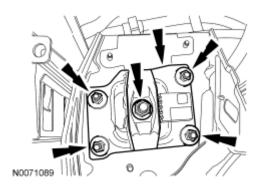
Locating Transaxle Mount Plate And Transaxle Mount Nuts Courtesy of FORD MOTOR CO.
